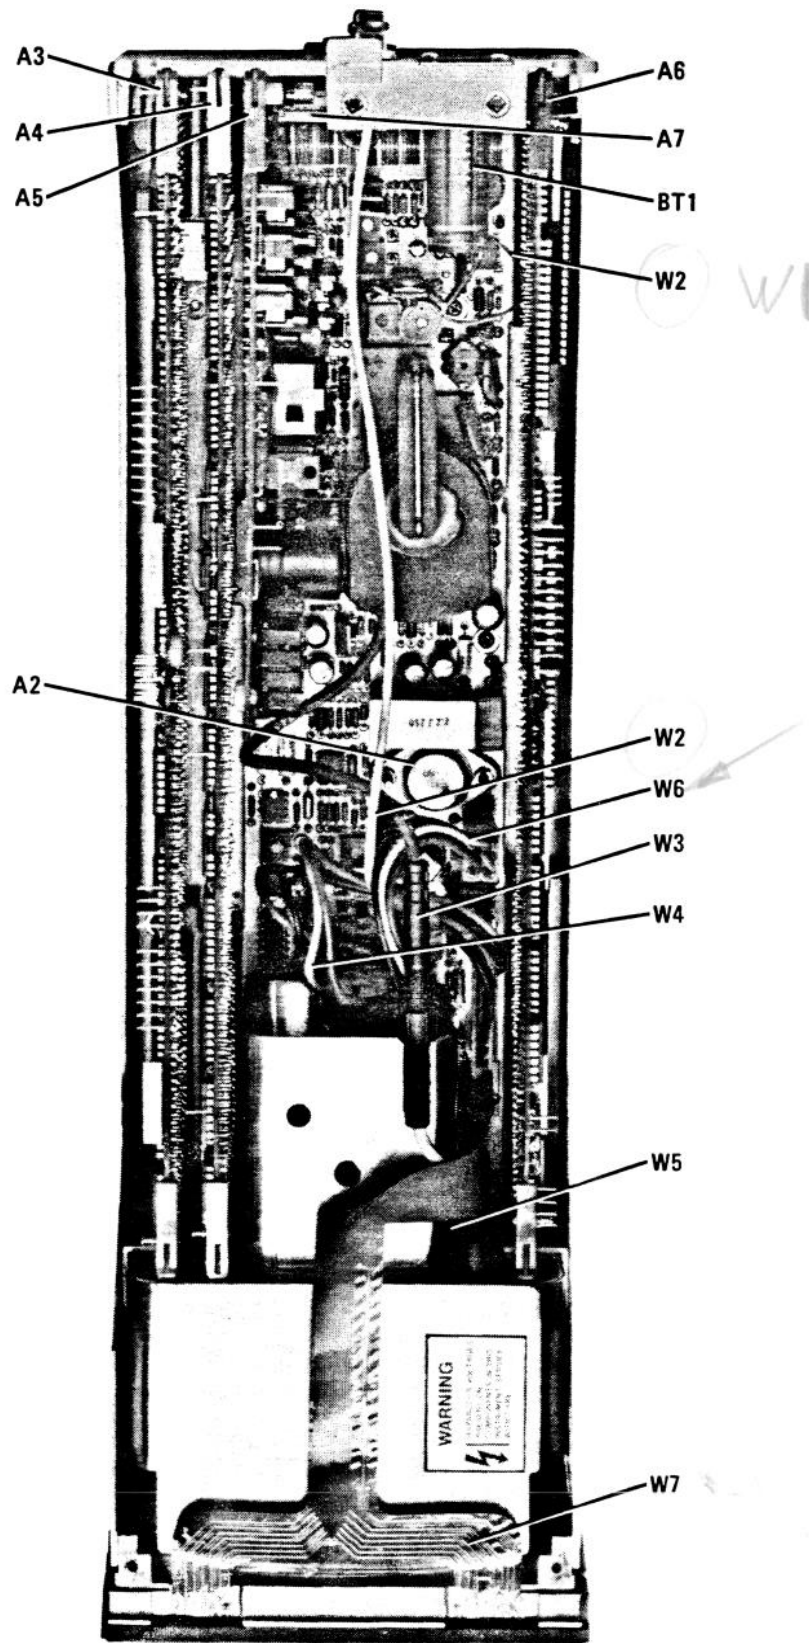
HP 70205A Major Assembly and Cable Locations (1 of 2)
